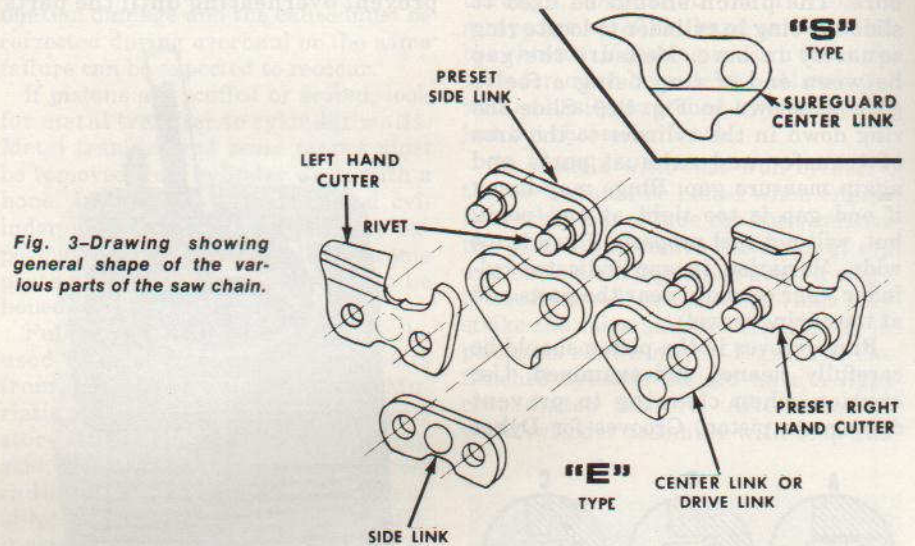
Drawing showing general shape of the various parts of the saw chain.
